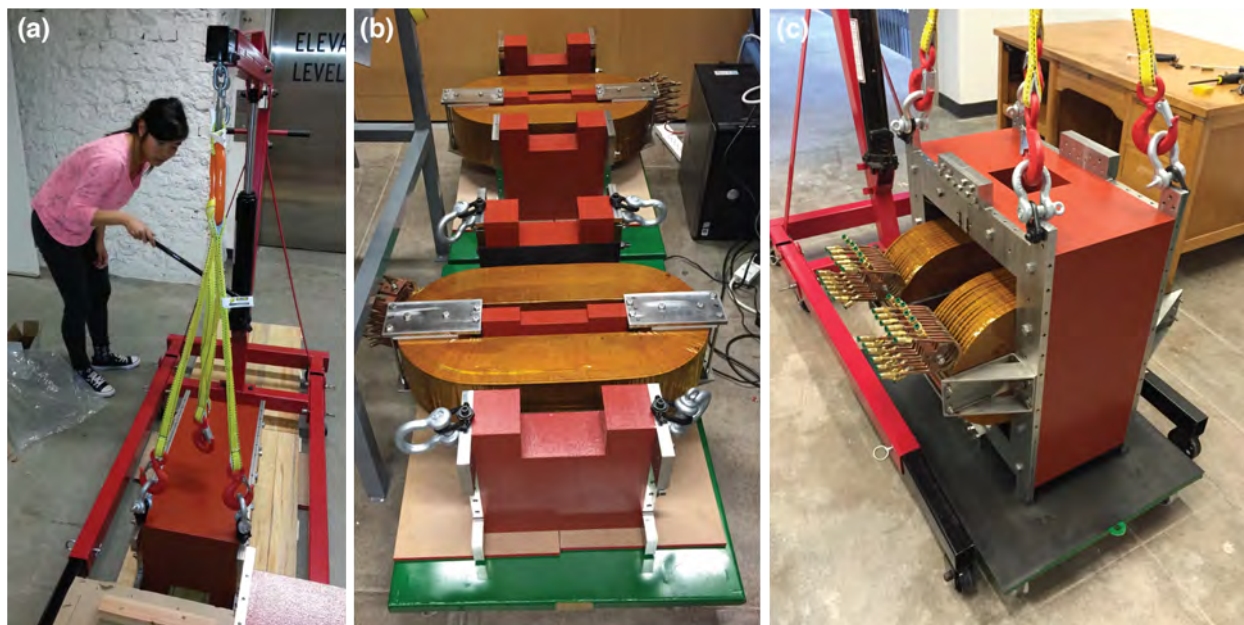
Magnet Assembly Photos. (a) Each half of the iron return is flipped and transported for coil mounting. (b) Each coil is centered and securely mounted onto the one of the E-shaped iron return half assemblies. (c) The two halves are assembled with custom stainless steel plates, and the entire assembly is turned for final mounting in the shield room.
